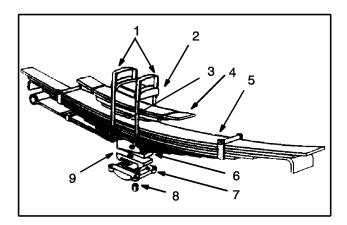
Vari-Rate Spring With Auxiliary Spring Assembly, For Rear Axle Application
